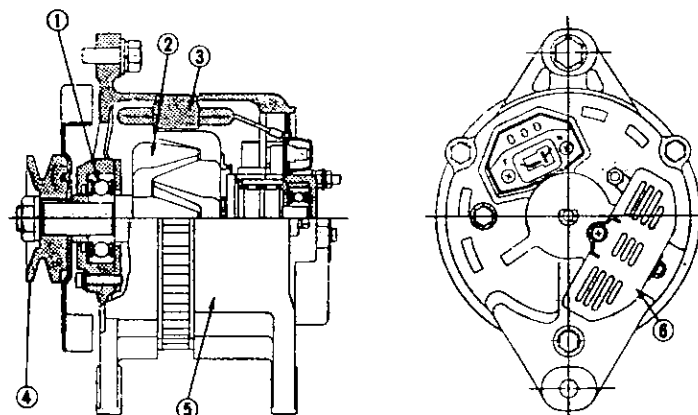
Exploded View of LT 150-05B (LT 135-13B)
